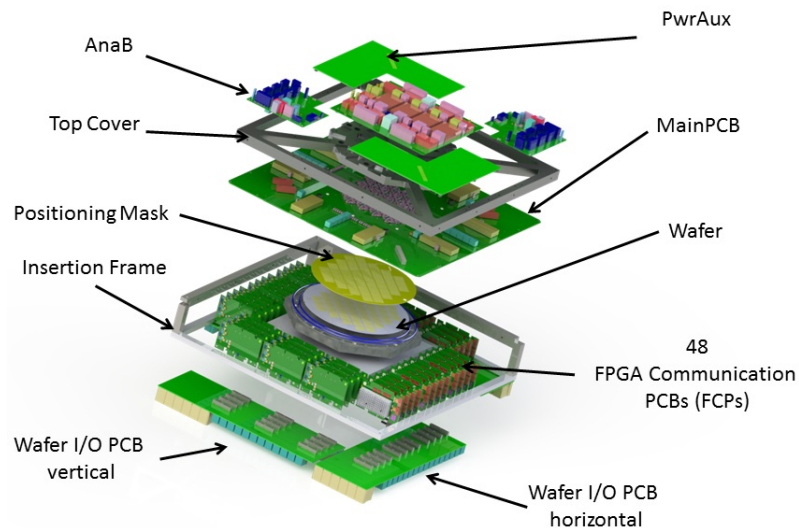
Exploded view of the design drawing of the Wafer Module. [8, p. 108]
